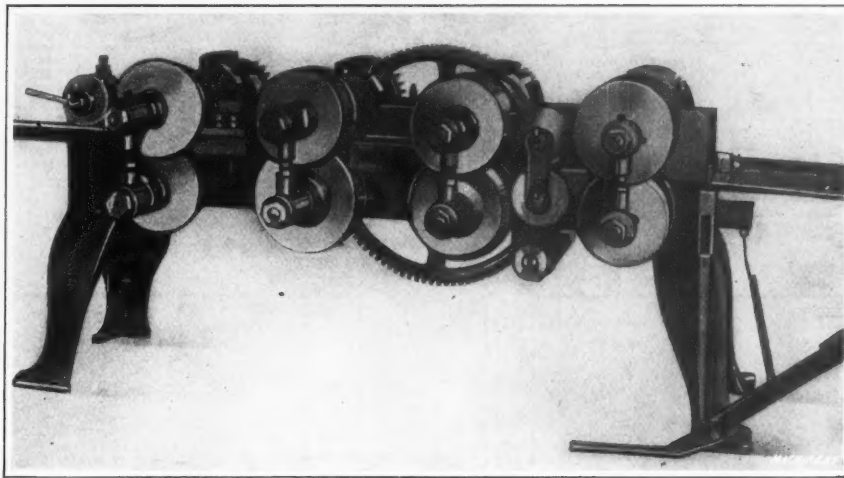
Eight-roll Channeling Machine as viewed from Roll Side
